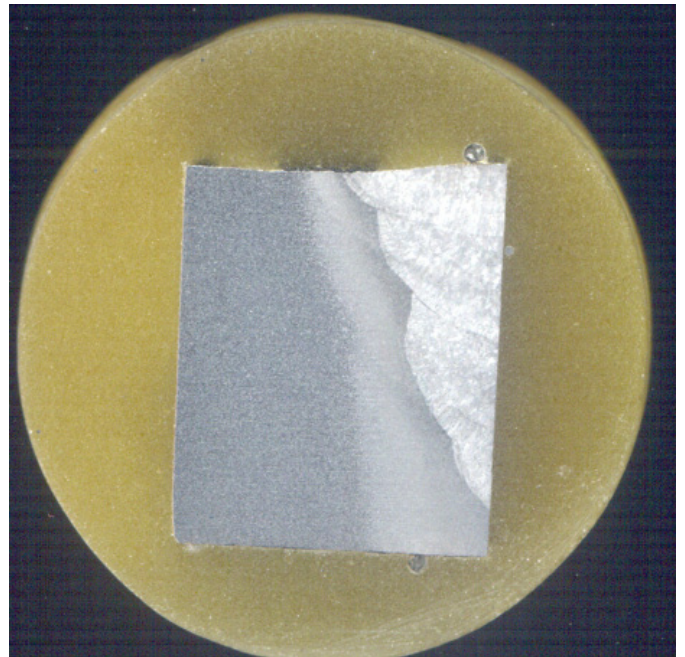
A fusion line of the weld on the side of the collector – cross-section.
